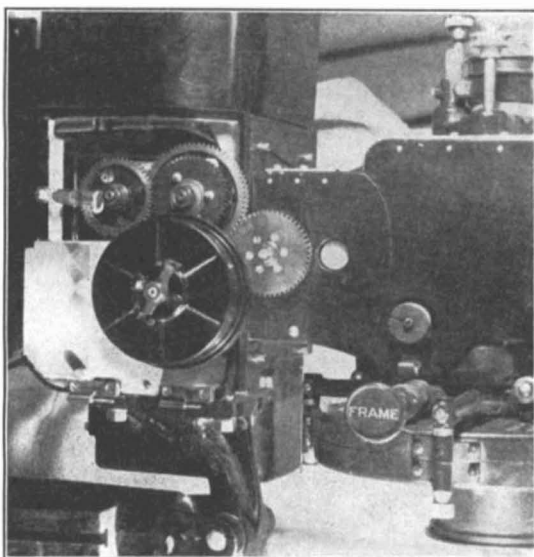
Completed mounting of projector head oil collection and projector adaptor plate and sound head. Allen screws which hold the sound head to the projector adaptor plate can also be seen.
